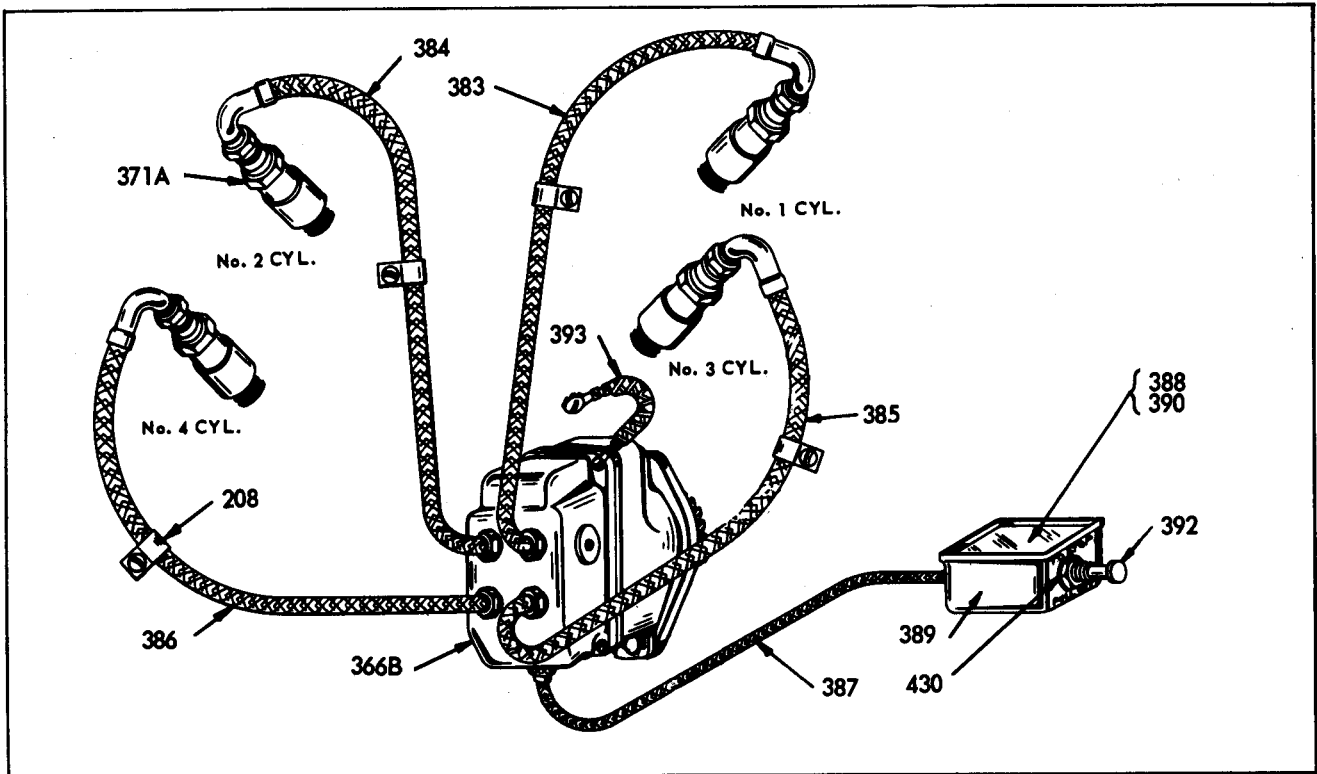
B, RADIO SHIELDED MAGNETO IGNITION FOR MIL-E-11275-A ENGINES
